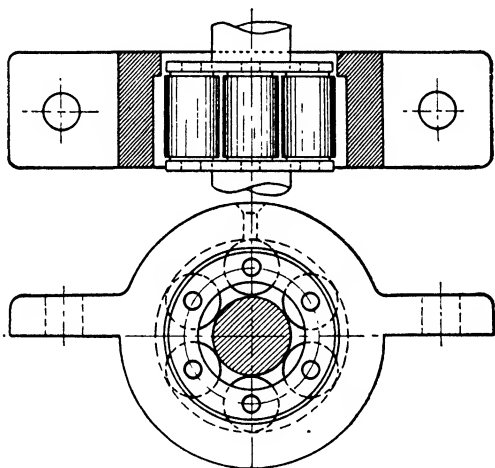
Details of Roller Bearings for Elevator Drum and Gears
